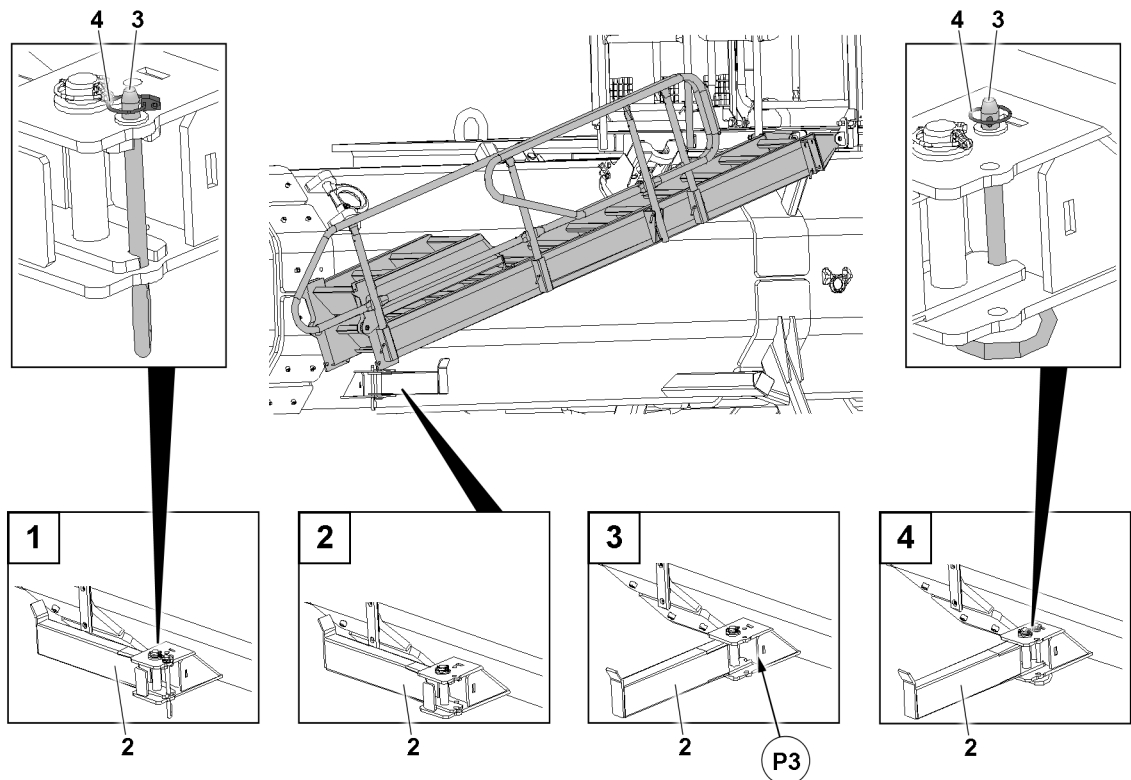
Assembling the ladder in the transport position — assembling the bracket in the operating position
